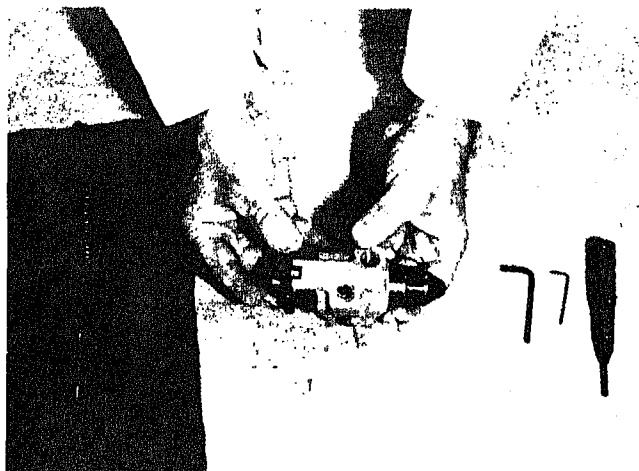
Center injector inlet in ST-726 inlet hole
